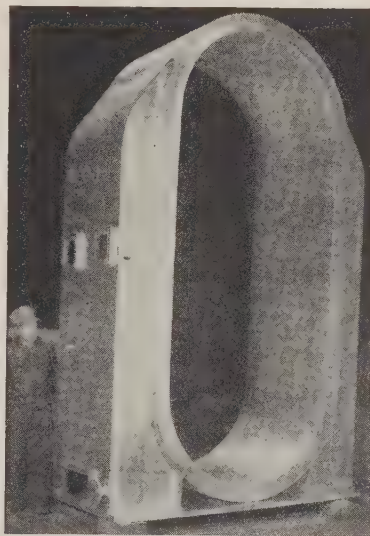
WELDED-STEEL CONTINUOUS BAND HYDRAULIC-PRESS FRAME
